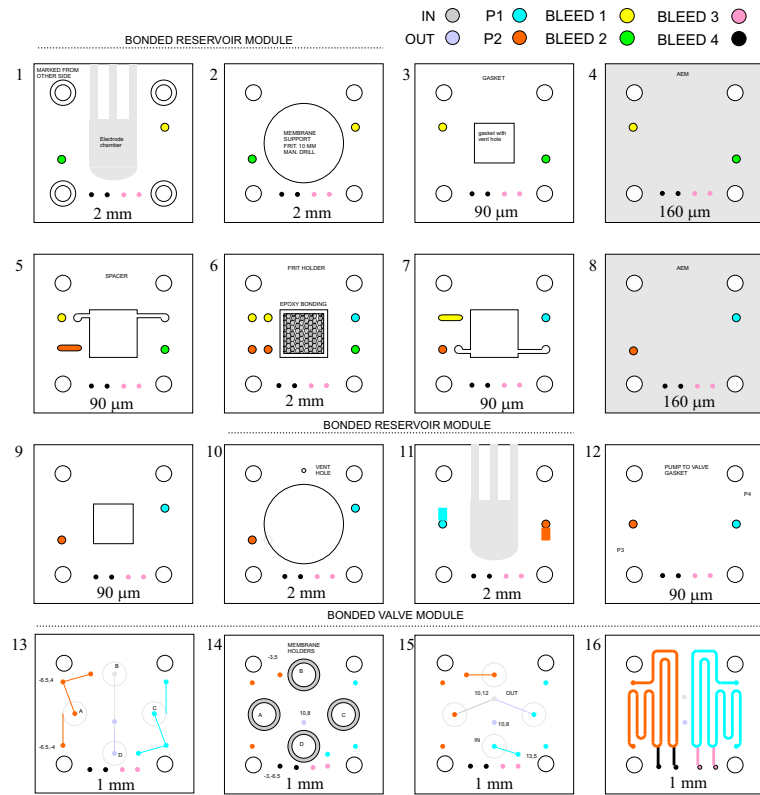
Drawing of the pump components. A 2D drawing software was used as a design tool to check the alignment of the through holes etc. The presented design is representative but not an accurate description of the final pump design. The thickness and sequence of the layers are indicated.
